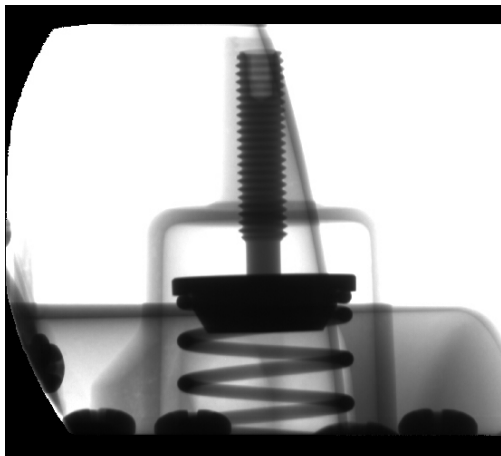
Upper Pressure Relief Valve, control assembly, x-ray.
